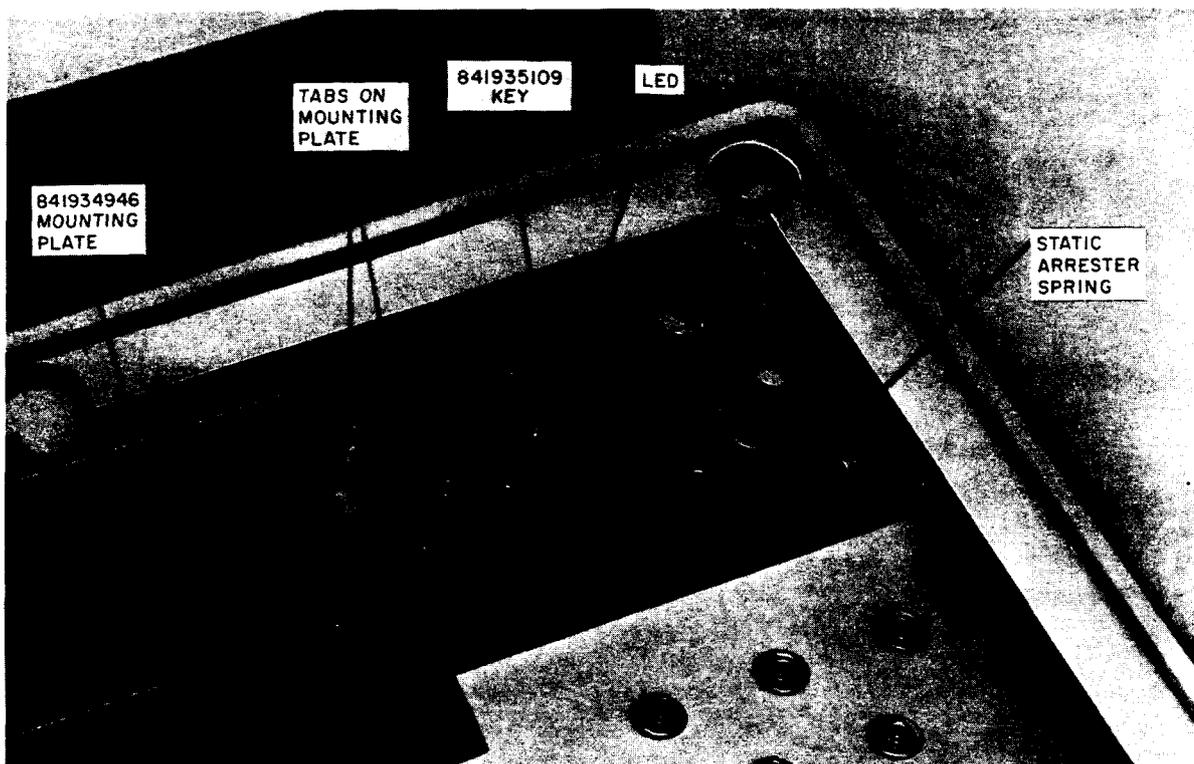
5000AM With Faceplate Removed Showing Mounting Plate and 651G Key Installed
